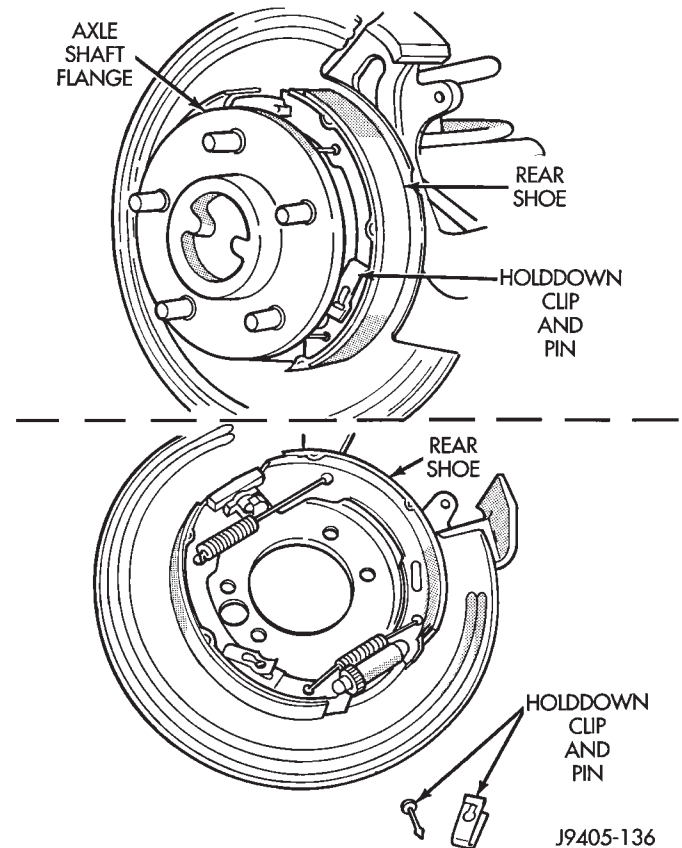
Retracting Parking Brake Shoes (With Rear Disc Brakes)
